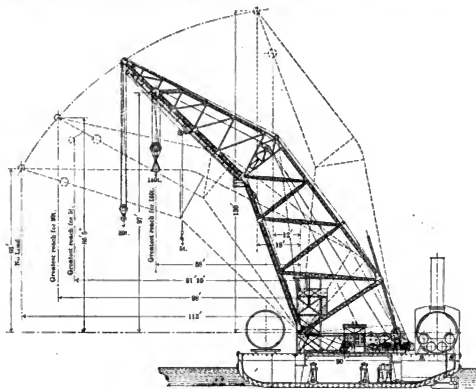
SECTIONAL VIEW OF 140-TON FLOATING CRANE.
